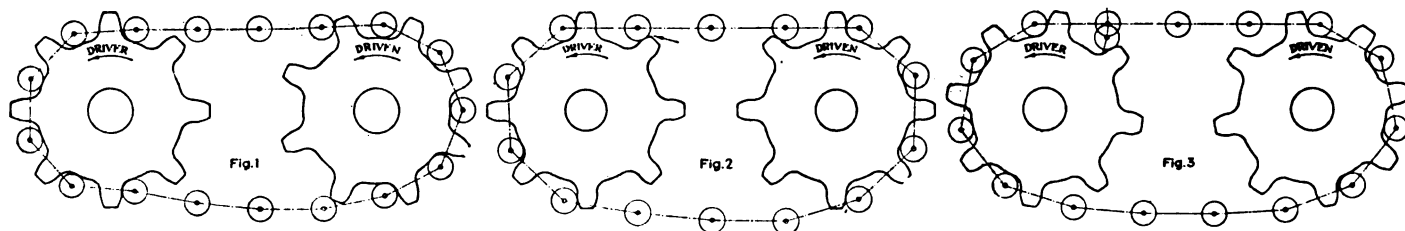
Old tooth form. Pitch of chain too small. Proper action on follower impossible. Pitch line clearance greater than necessary for driver. Fig. 2—Old tooth form. Chain pitch length too great. Clearance not sufficient. Fig. 3—Old tooth form. Chain elongated. Clearance ample. When roller No. 1 is released No. 2 comes against the tooth with a snap. The motion of the sprocket will be jerky
